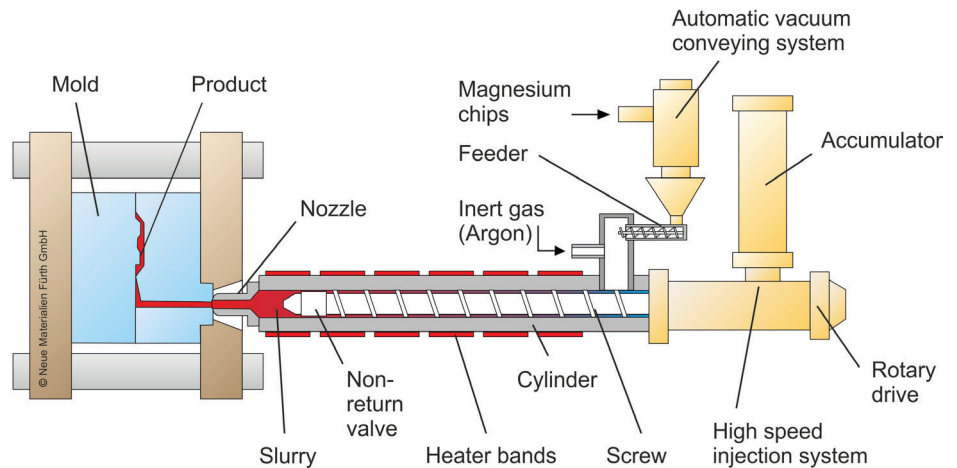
Schematic drawing of magnesium injection molding (Thixomolding®).
